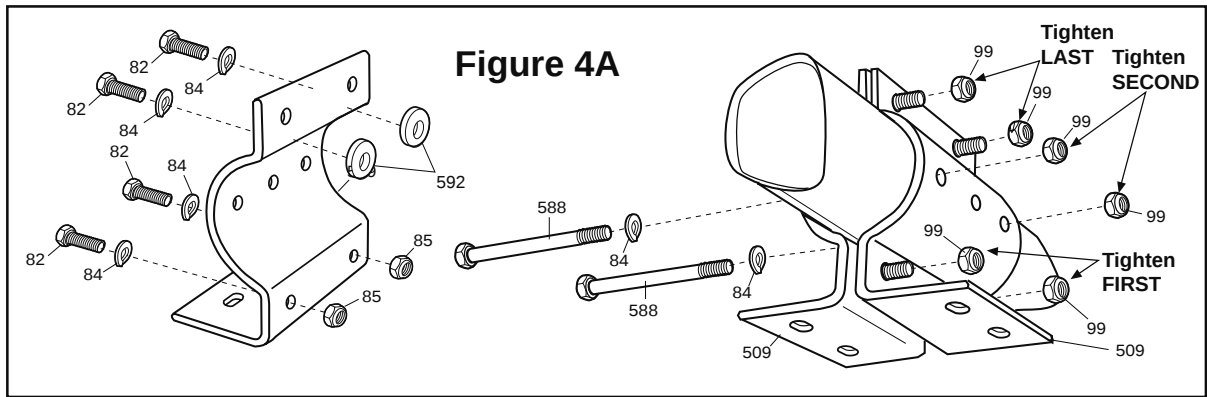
, 2, 3 and 4 show the steps for boom assembly. Identify the tubing sections, element brackets and hardware required for this step by using the Boom Subassembly Parts List. Note the element brackets for Elements #3, #6, #7 and #8 join the boom sections (Figure 3).
